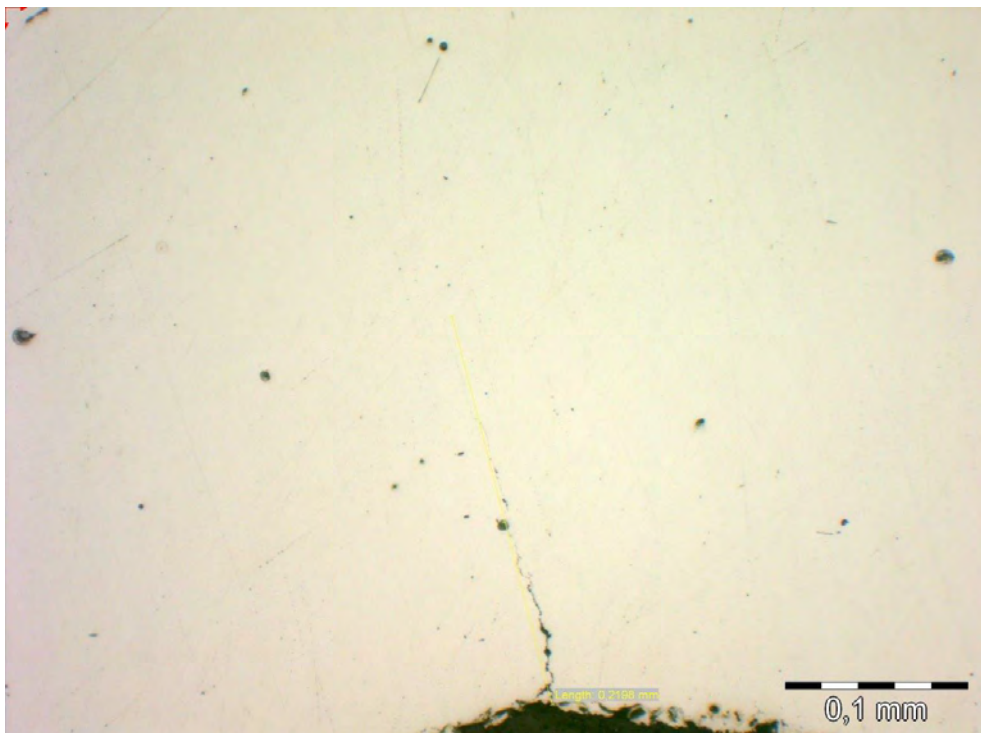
Crack at segment C, first ridge on barrel no. SFK 0120-A
